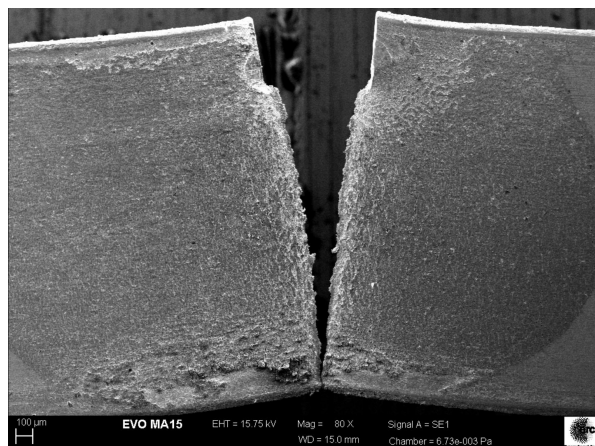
Crack path of the failed specimen with 0.45 mm notch.
